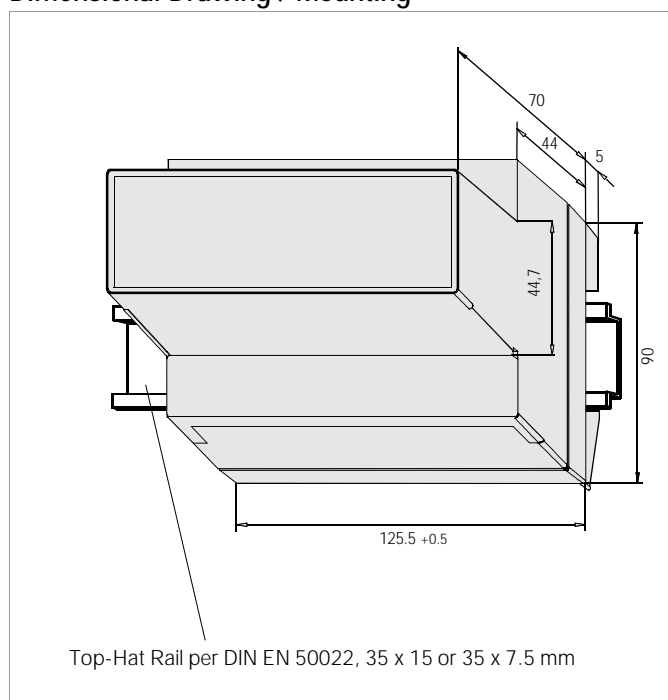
Dimensional Drawing for Top-Hat Rail Mounting (Front and Side View)
